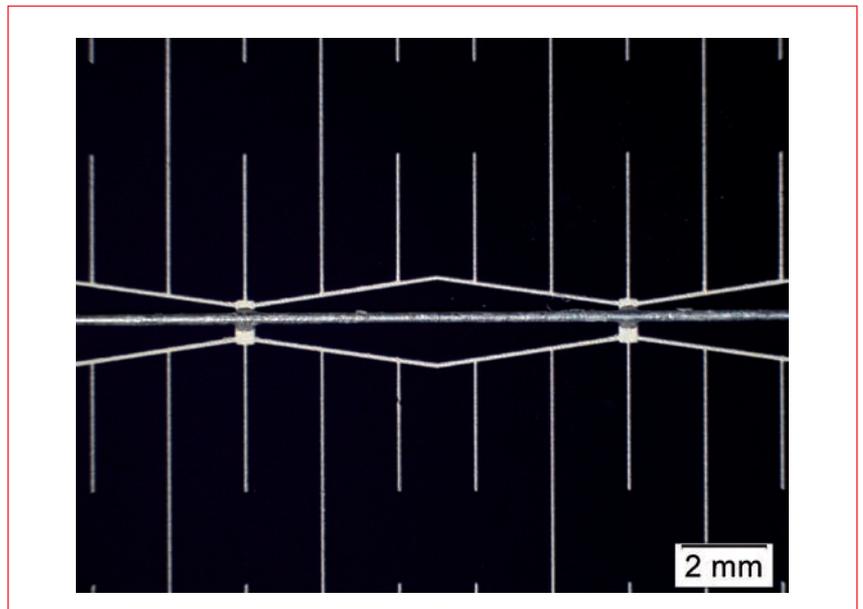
Ag screen-printed contacts: improved design, with a reduced number of solder pads and a more complex grid finger layout.
